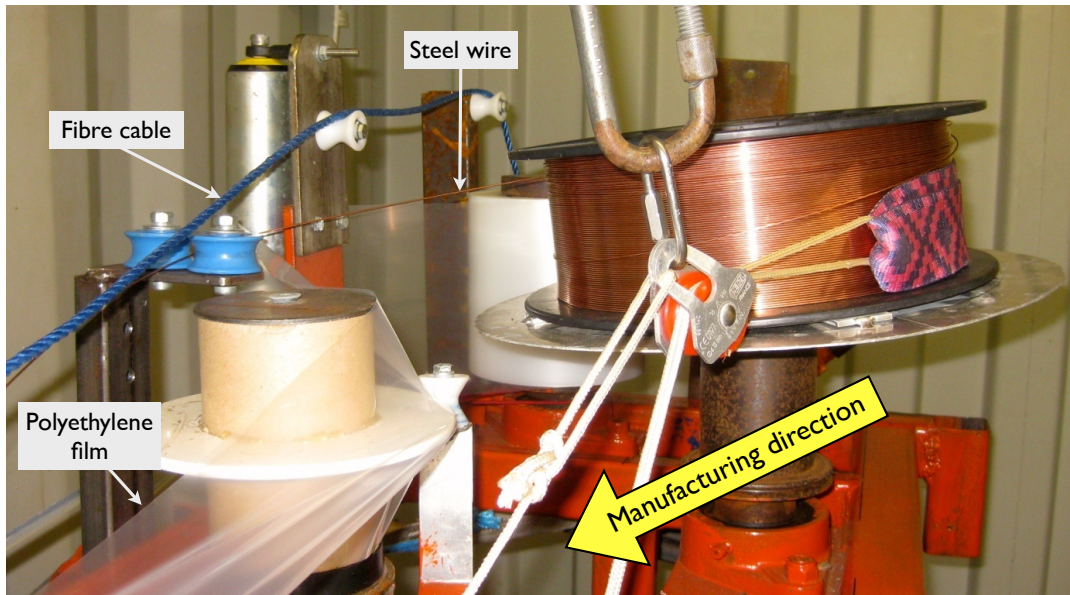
Step 1, the polyethylene film, fibre cable and steel wire ready to feed into the manufacturing process.
